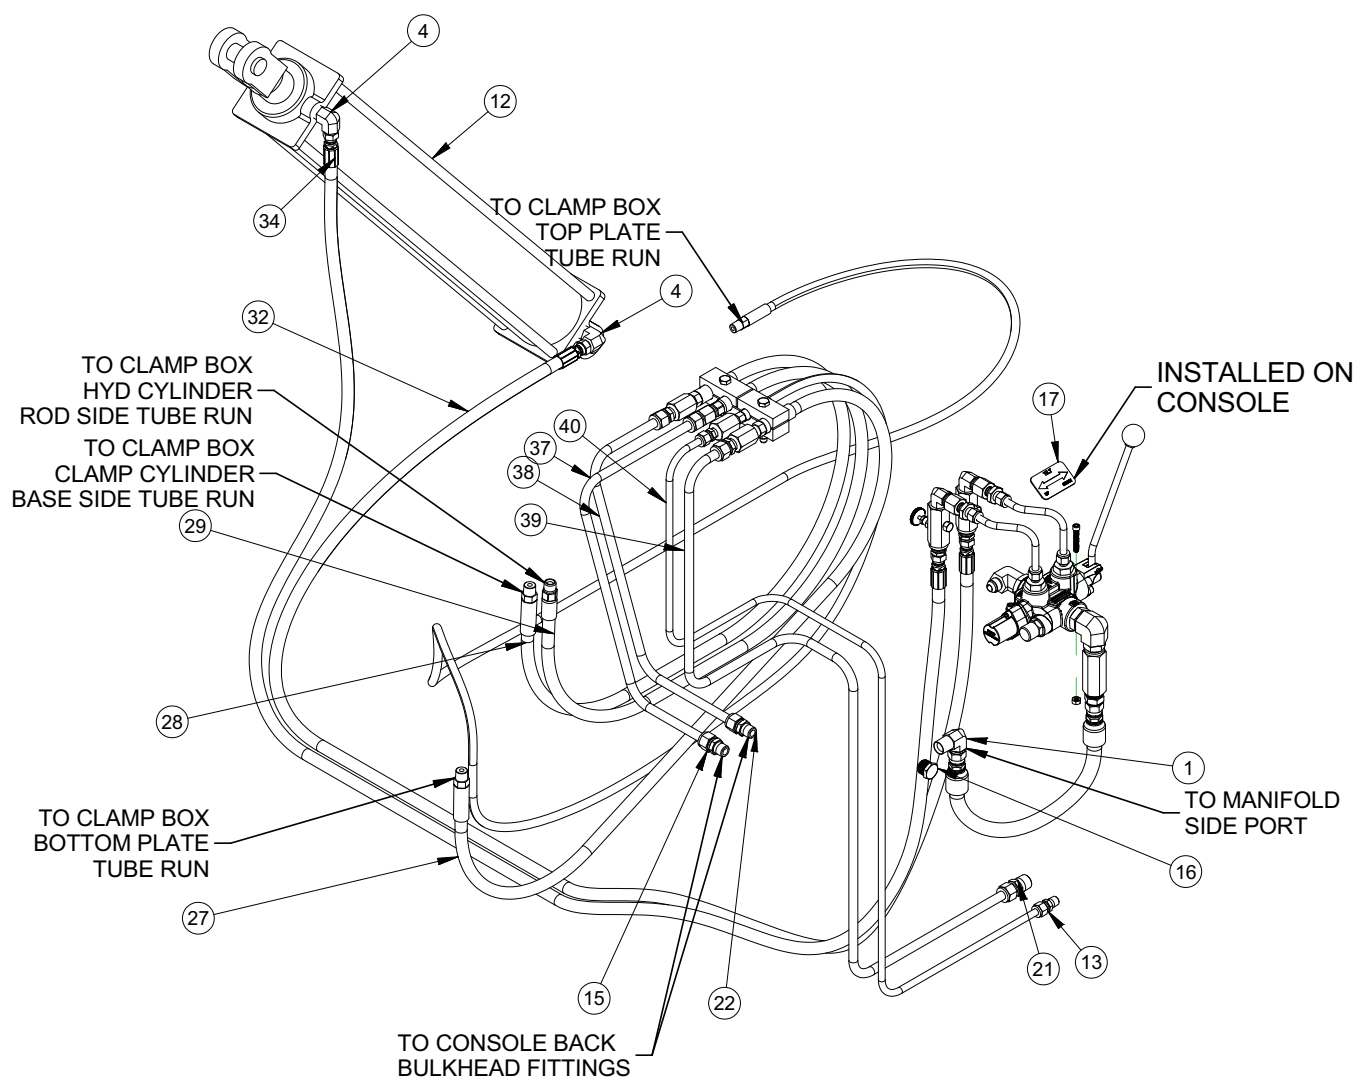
TILT MODEL KIT ASSEMBLY (P/N 91448)
